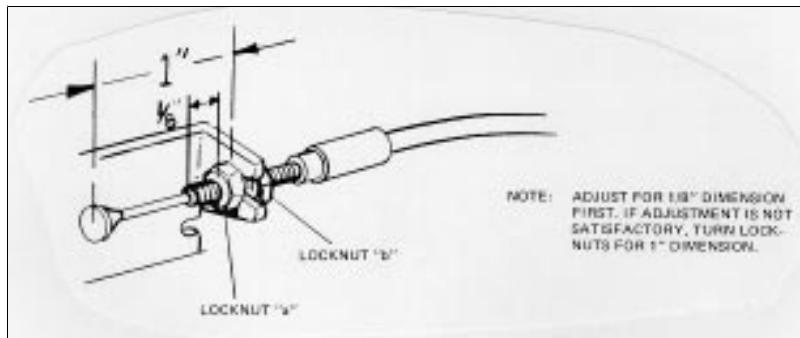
Adjusting the "Pre-View" Shutter Cable (Sliding Camera Head)
